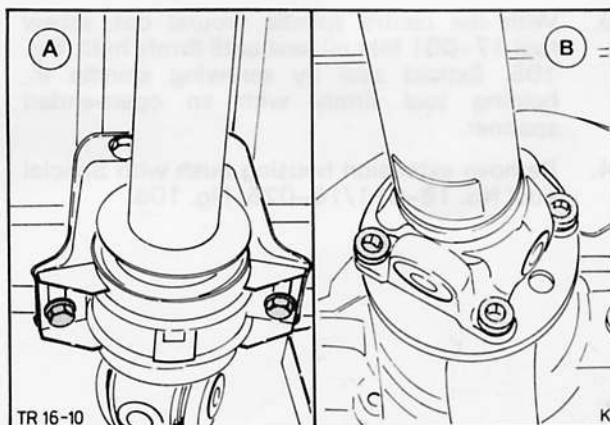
Driveshaft mountings - rear axle flange and centre bearing
